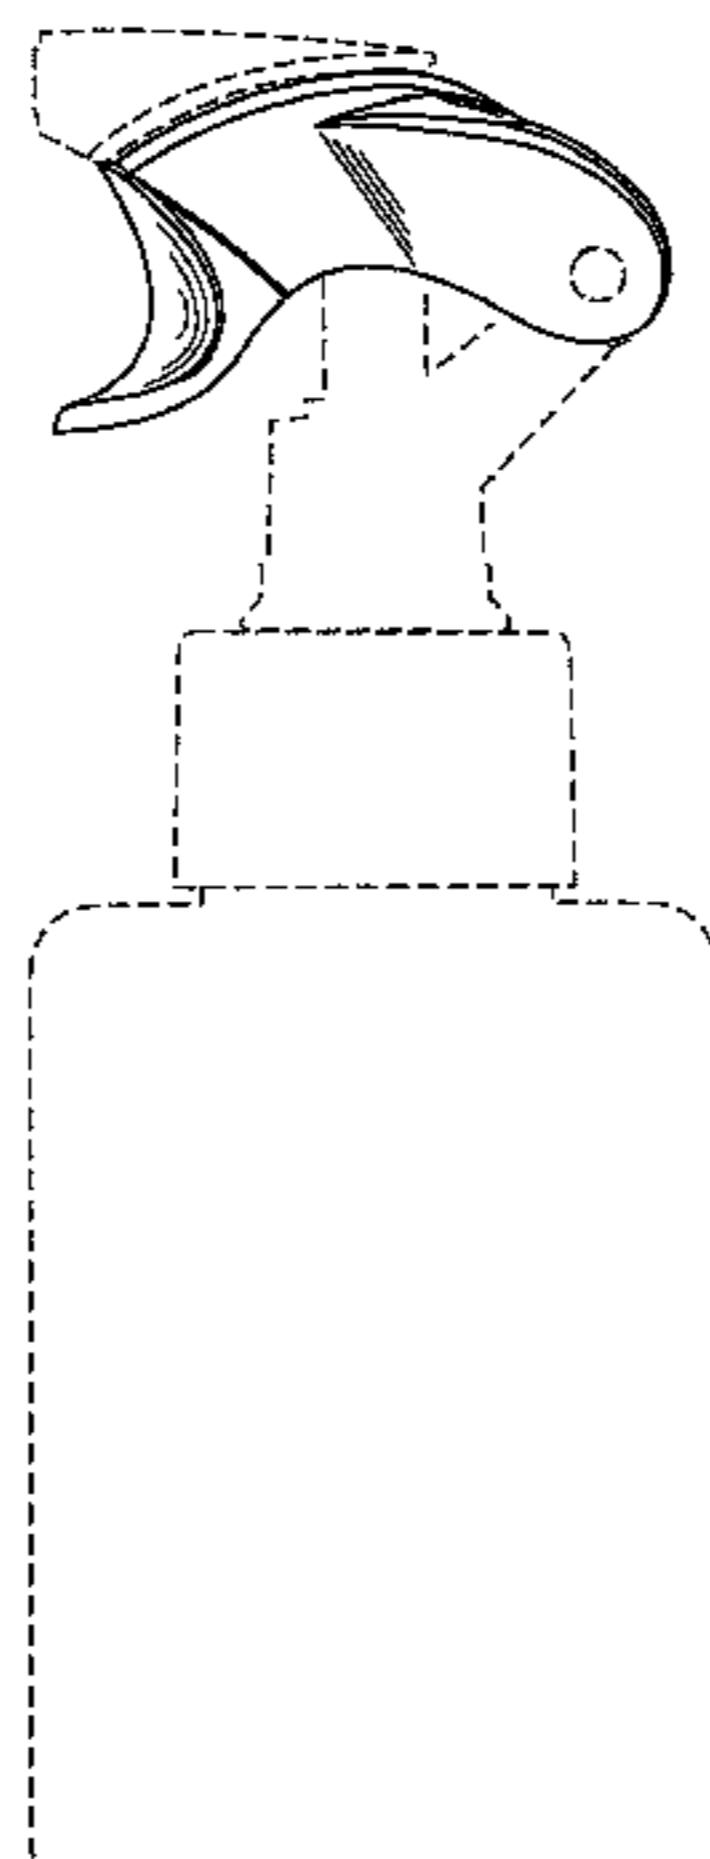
is a perspective view of the trigger sprayer shown in FIG. 13;
